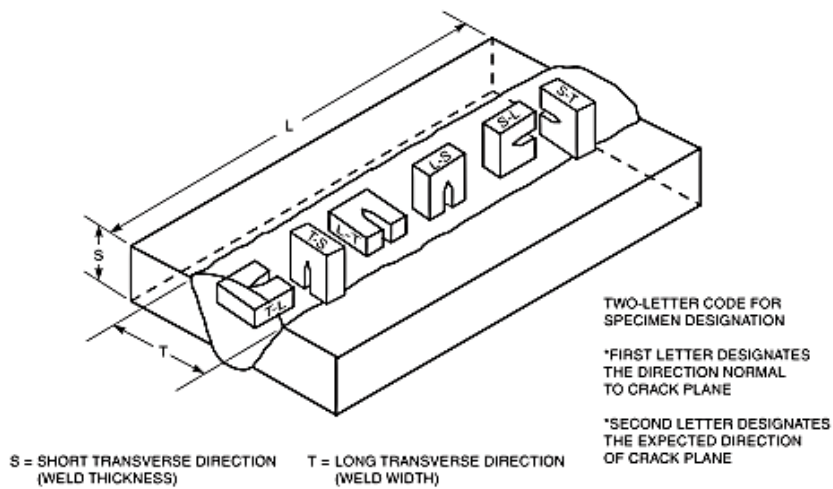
Crack Plane Orientation Code for Compact Tension Specimens from Welded Plate
